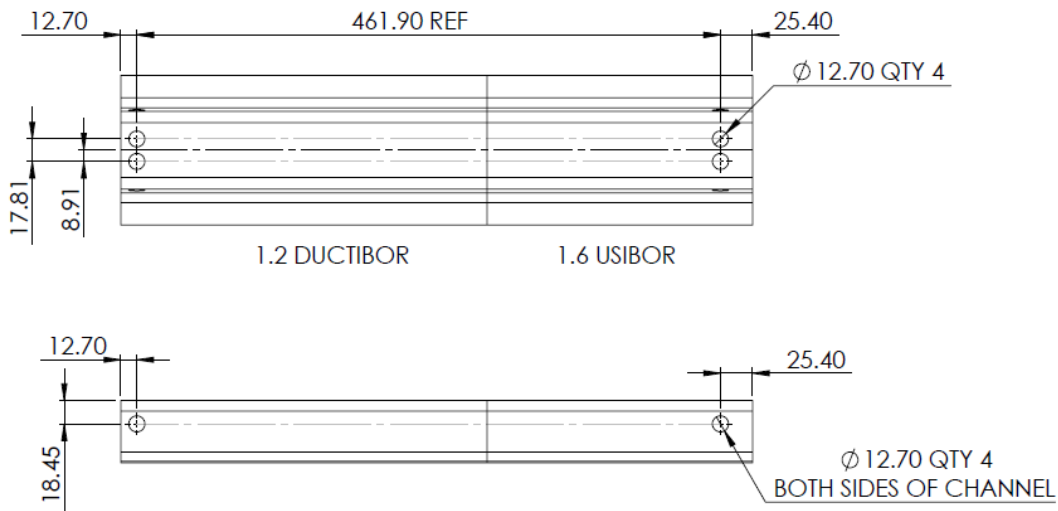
Laser cut holes for fixturing. TWB part is shown, monolithic parts are identical. Dimensions in millimeters.
